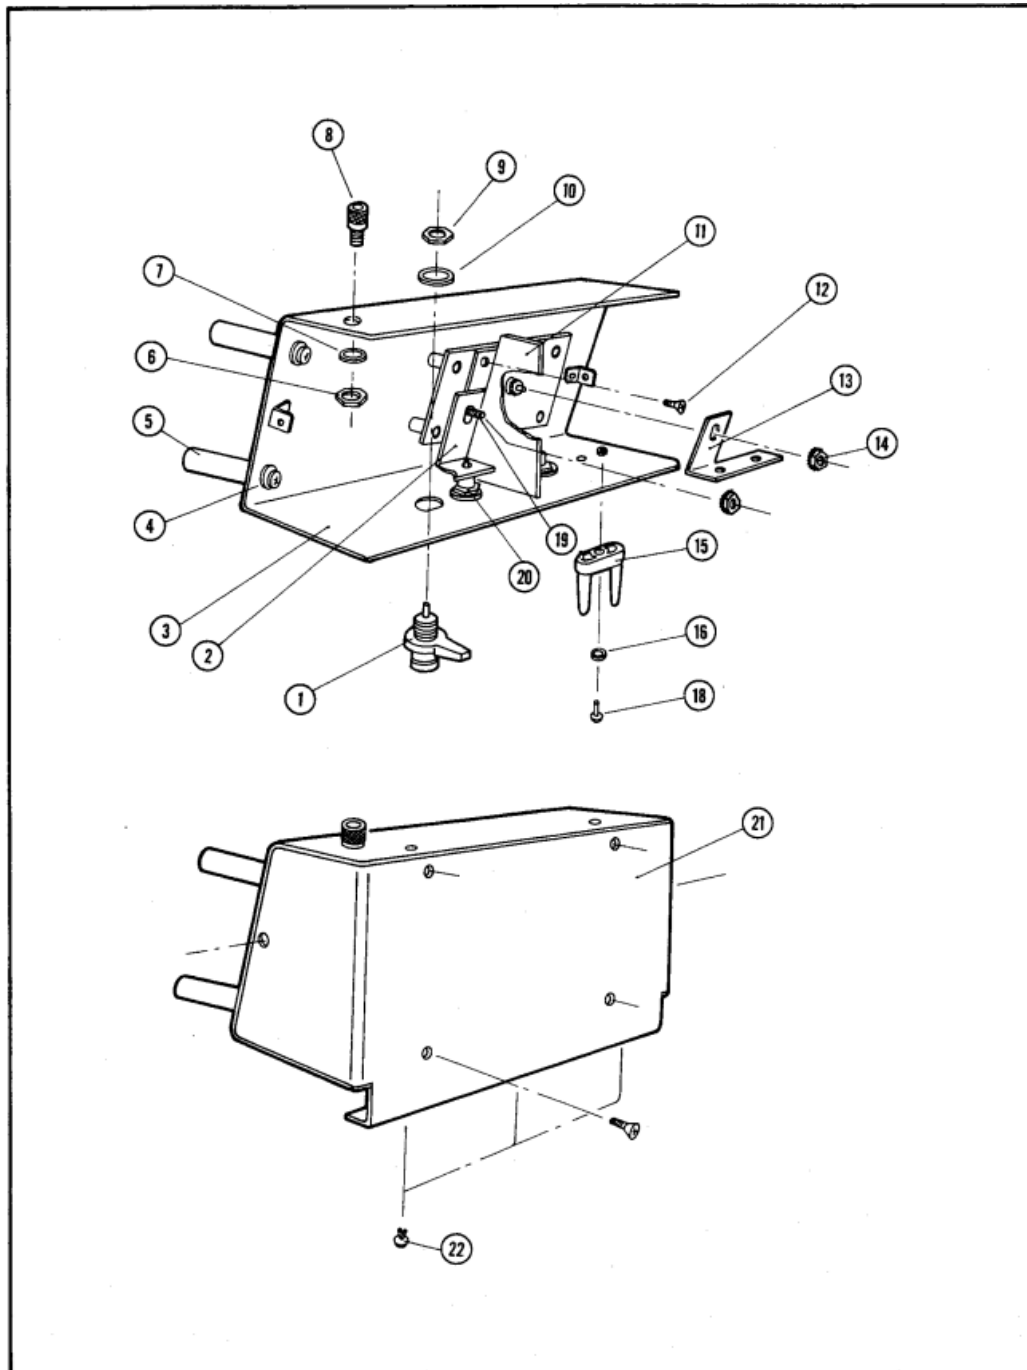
Parts Identification for 16085A (Sheet 1 of 2).
